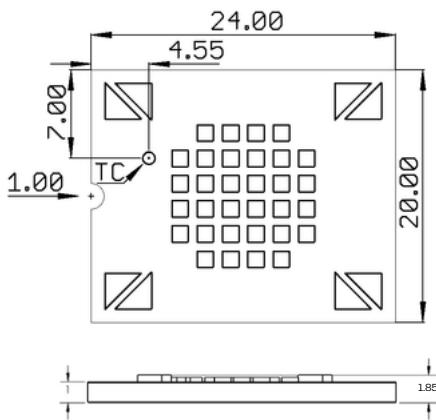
L512A-RGBxxxY Mechanical Drawing
